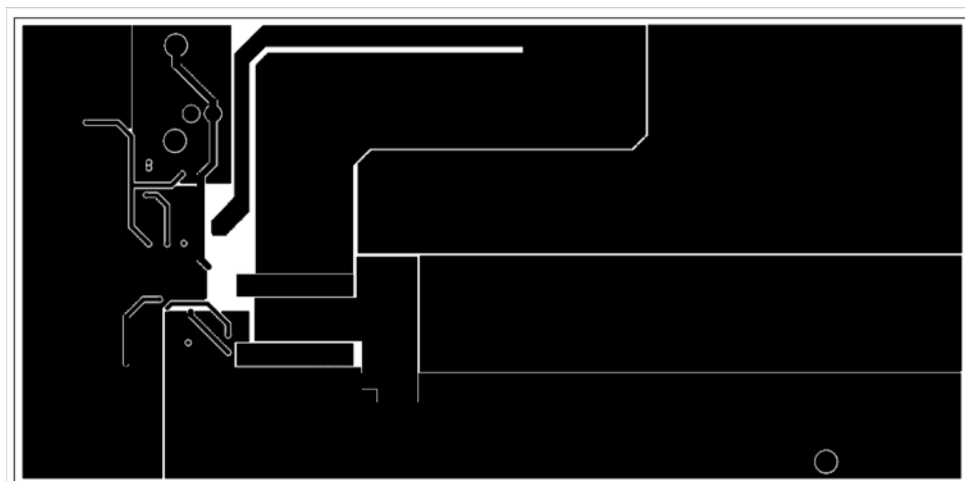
ISL8106EVAL1Z - BOTTOM LAYER (SOLDER SIDE)
